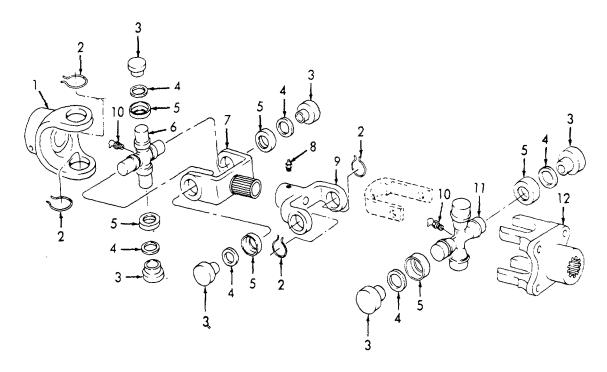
Power takeoff universal joint and shaft assembly, removal and installation.
